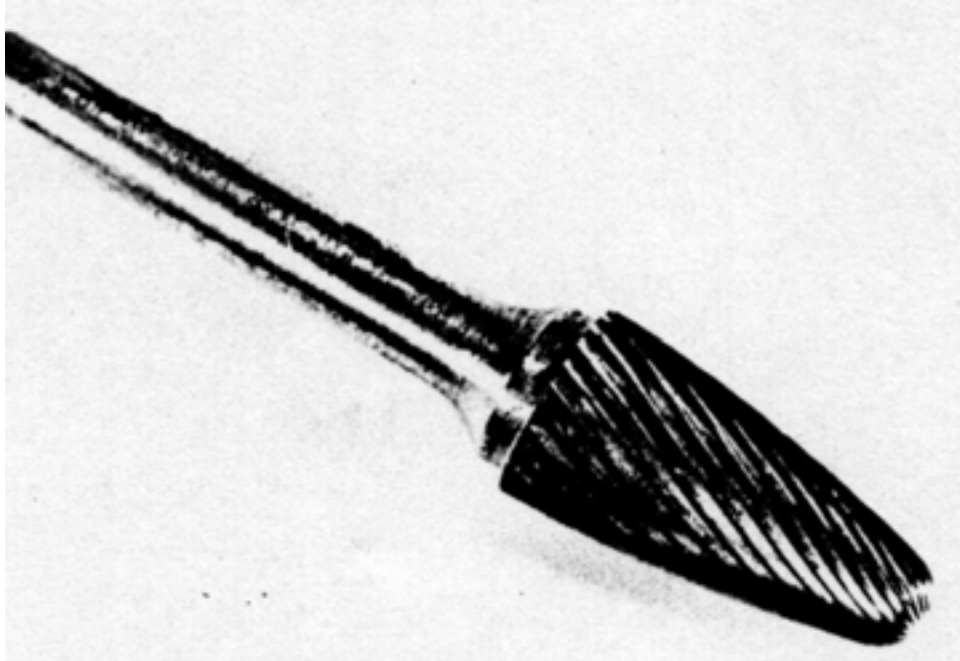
Tree-Shape Burring Bit for Grinding Tool
